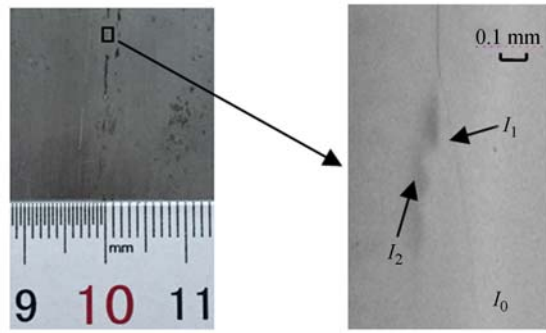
Schematic of MO imaging for detecting weld defects
